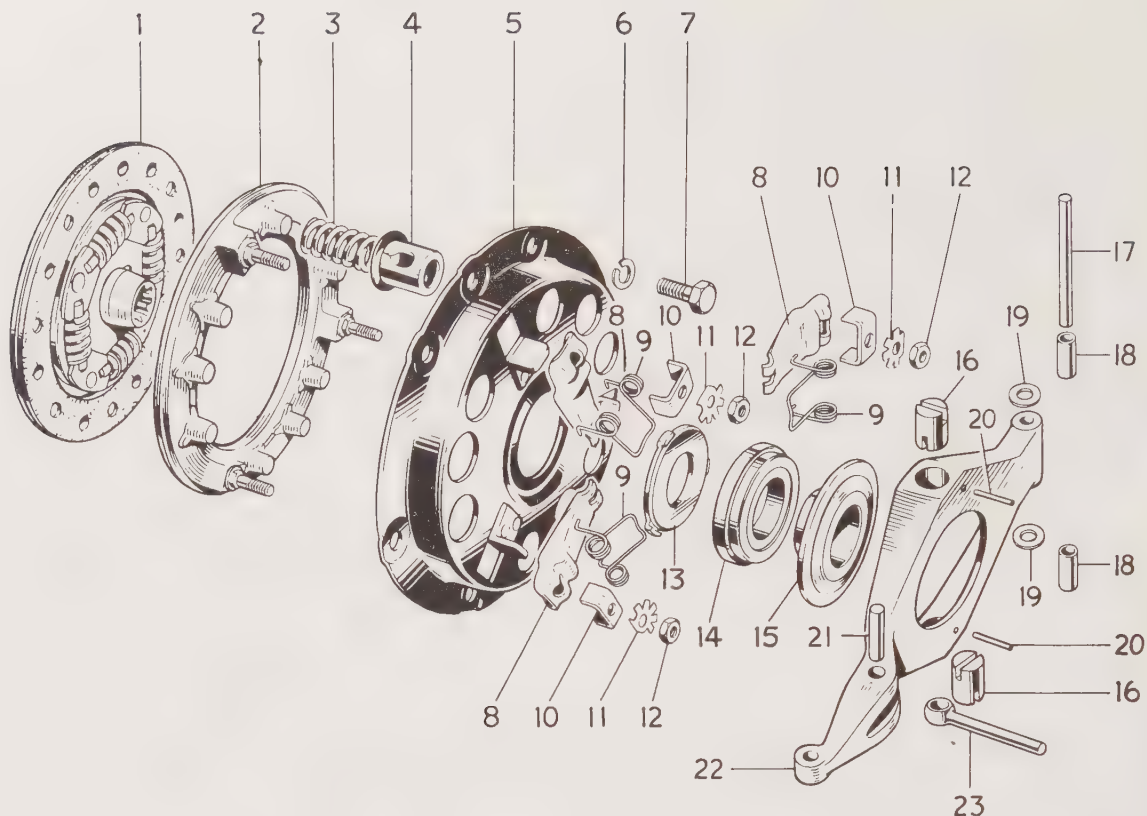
3 Clutch components and operating mechanism, early 'Spitfire', coil-spring type.
